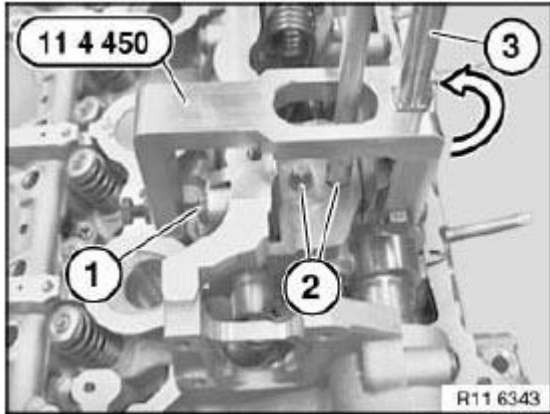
Moving Eccentric Lever On Special Tool (11 4 450)
